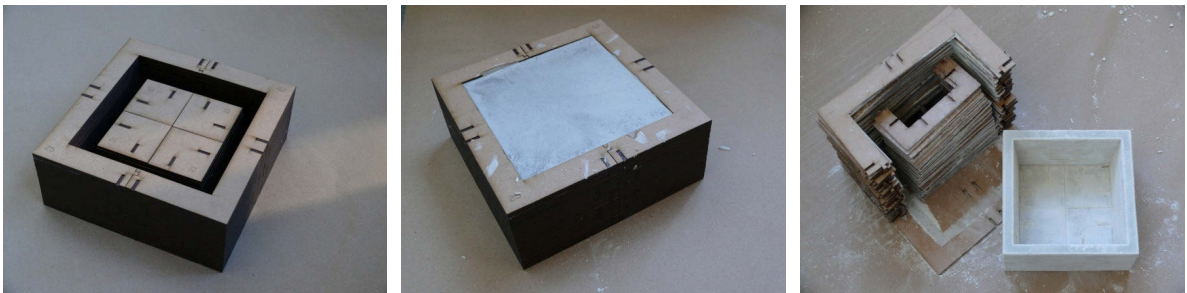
Lasercut mold of 6"x6"x6"(1/2" perimeter thickness) hollow cube.
